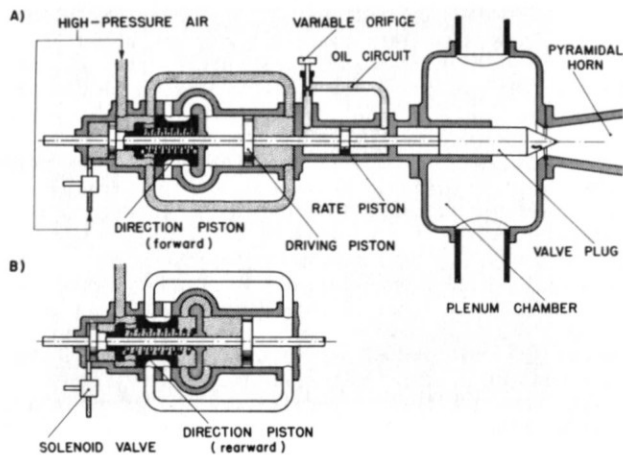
Assembly drawing of mass flow valve exhibiting opening (A) and closing (B) operation.
